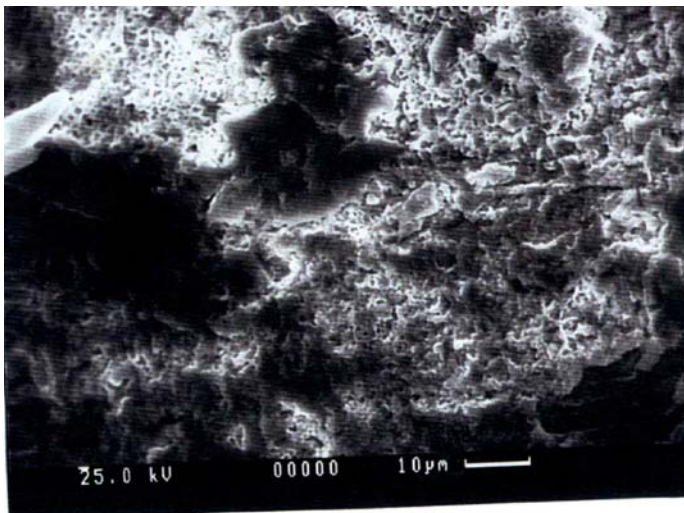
The SEM image shows B1 (figure 12) fracture surface of the #1 wire. The fracture surface has deposited and minor 1~3 μm diameter dimples.
